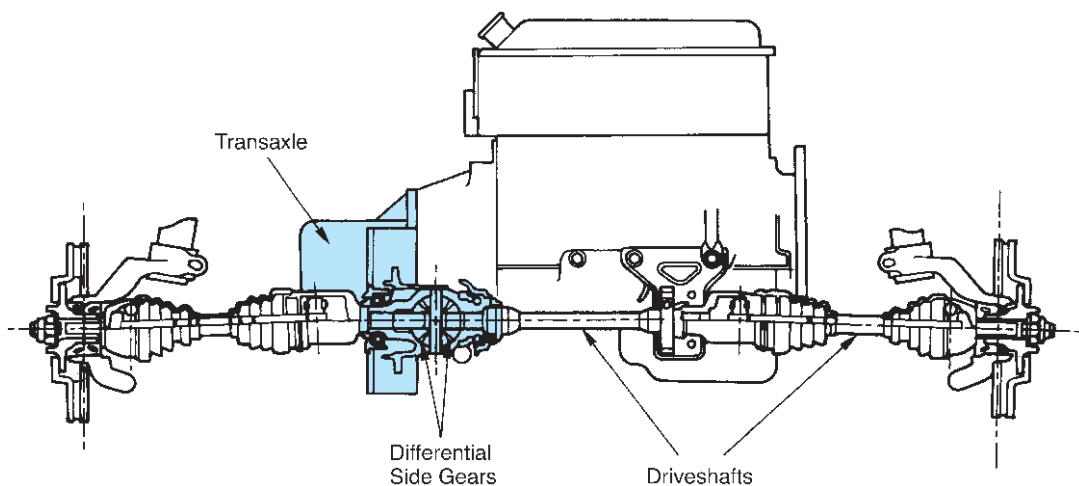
A transaxle is a transmission plus the final drive and differential. The inner CV joints of the front driveshafts connect to the side gears in the transaxle differential. (Courtesy of Ford Motor Company)
